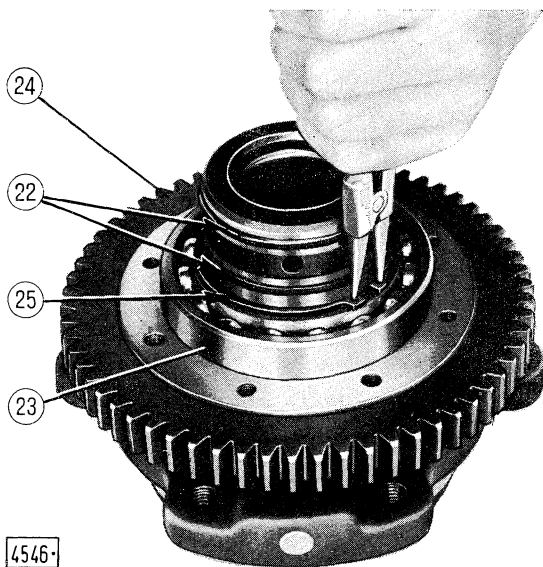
Removing (or Refitting) Intermediate Ball Bearing Circlip
